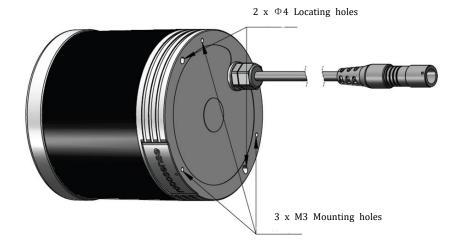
LiDAR Mounting Holes & Locating Holes Diagram
